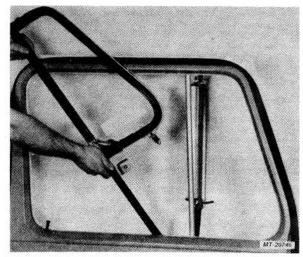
Removing or Installing Door Vent Glass and Front Run Channel
